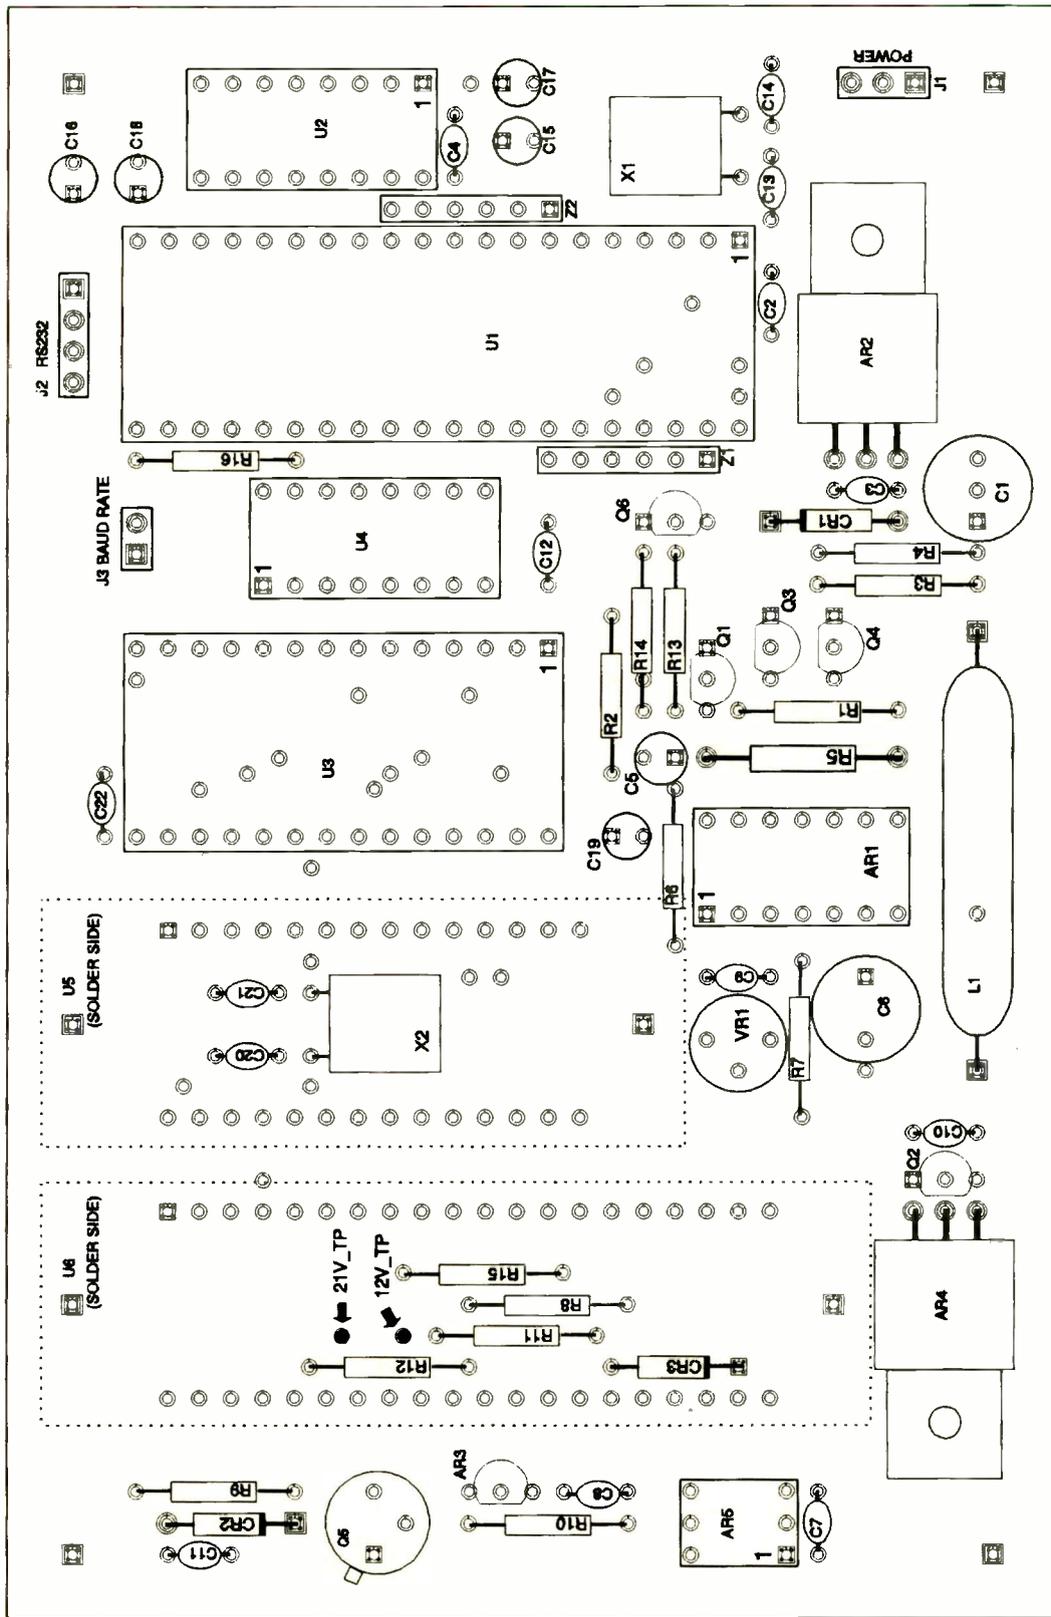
Wiring guide for printed-circuit board. Note that ZIF sockets plug into standard solder-tail DIP sockets on *solder* side of board.
